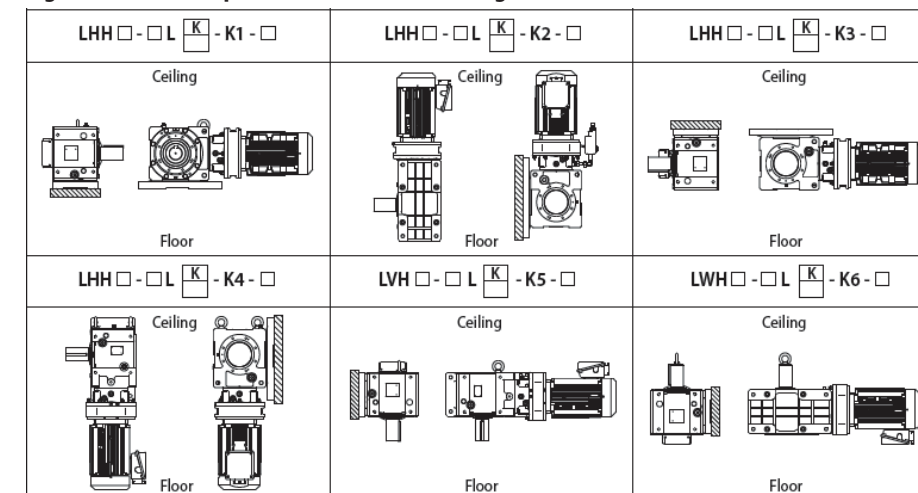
Solid Output Shaft Left (L) - Mounting Foot Bottom
